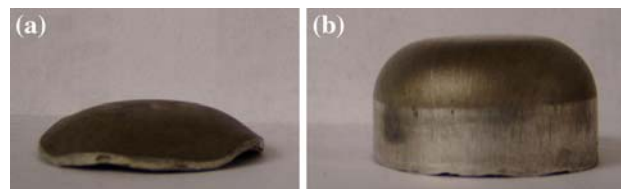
The specimens after the deep drawing test at room temperature. (a) As-received/annealed; (b) ECAR/annealed
